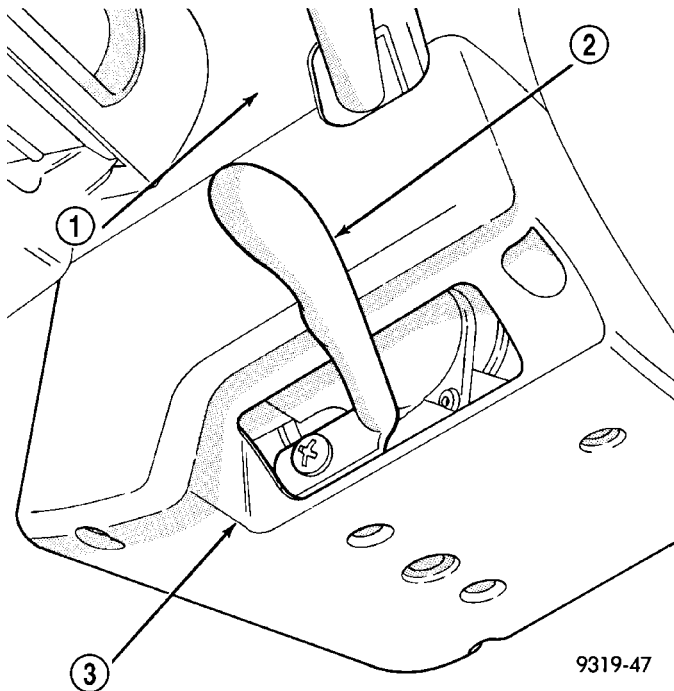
Tilt Lever, Upper And Lower Shrouds
